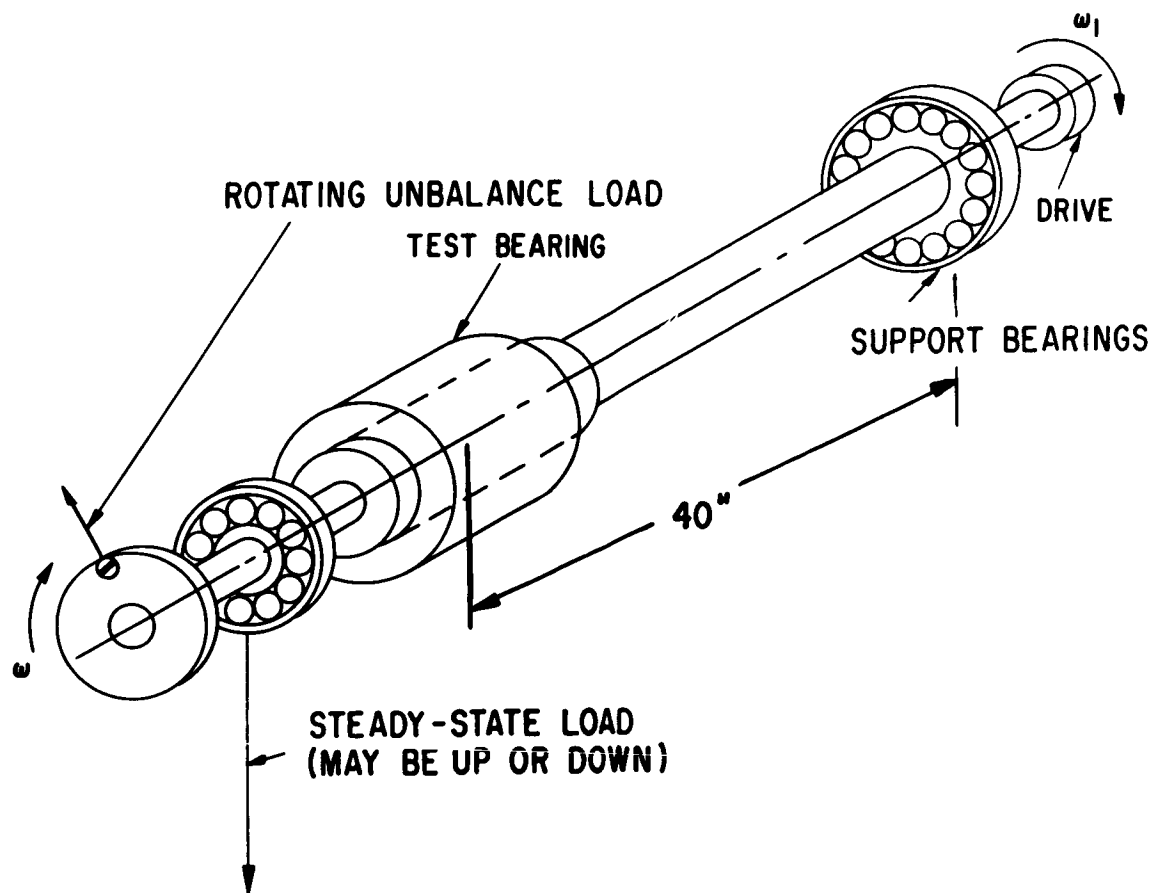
Schematic of apparatus shaft and bearing assembly.
